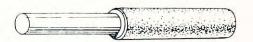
61–3382 Valve guide fitting and extracting punch.
